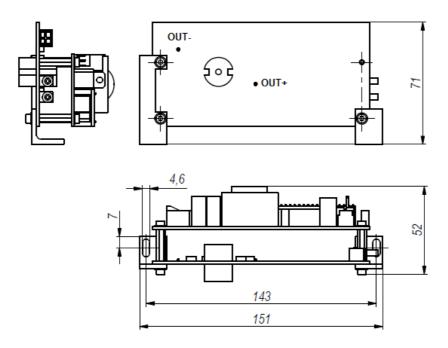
Outline drawing and dimensions of the driver with HV supply without case
